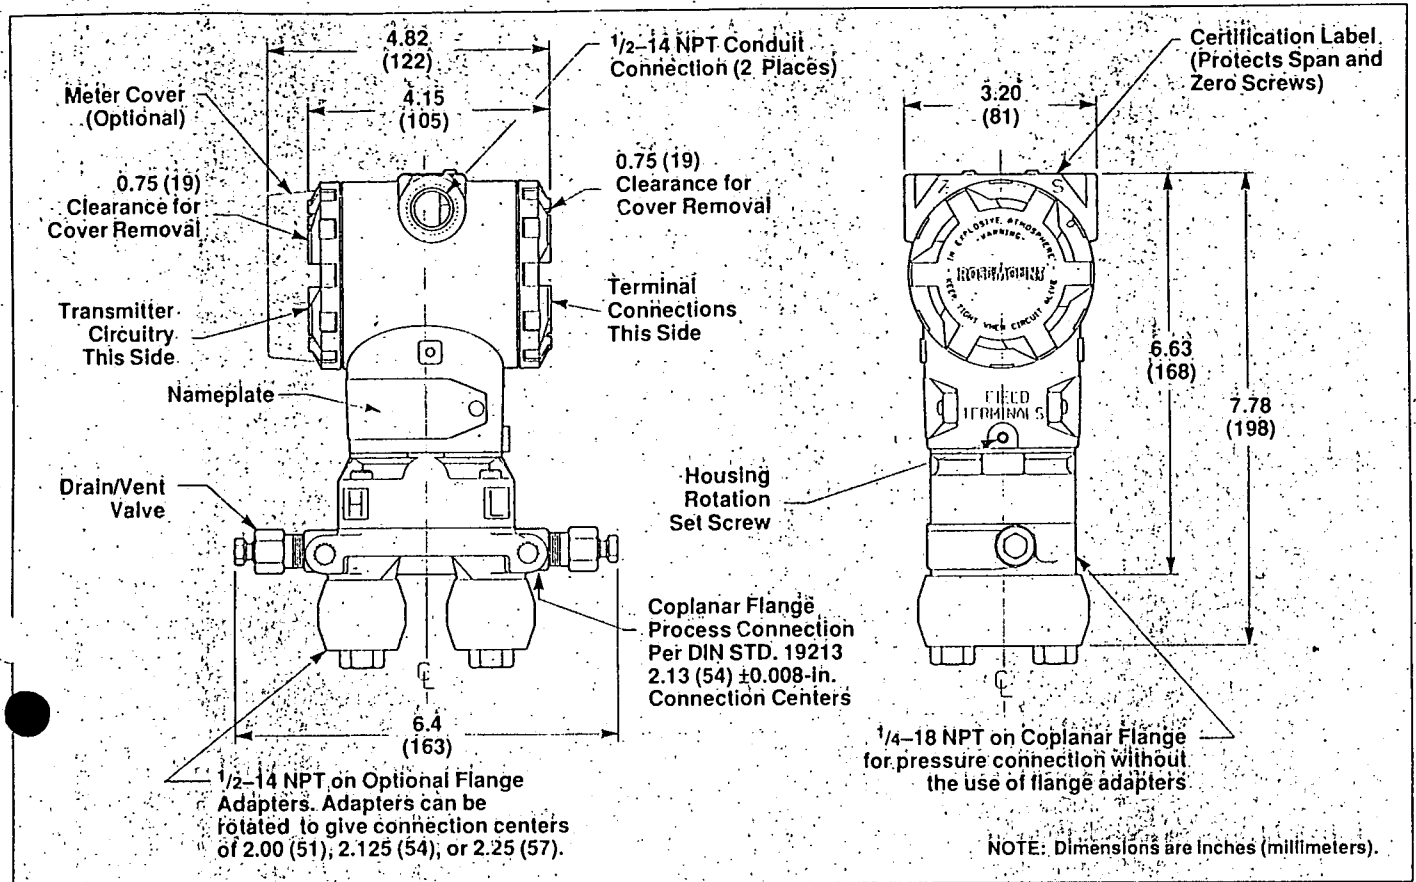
Model 3051C Differential Pressure Transmitter Dimensional Drawing
